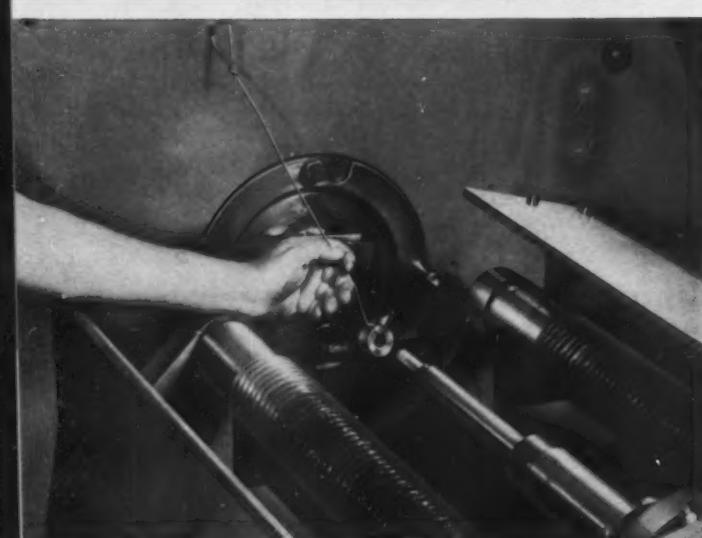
Too hot to handle after forming, the tool-steel work-piece is taken from the mandrel on a wire hook.
